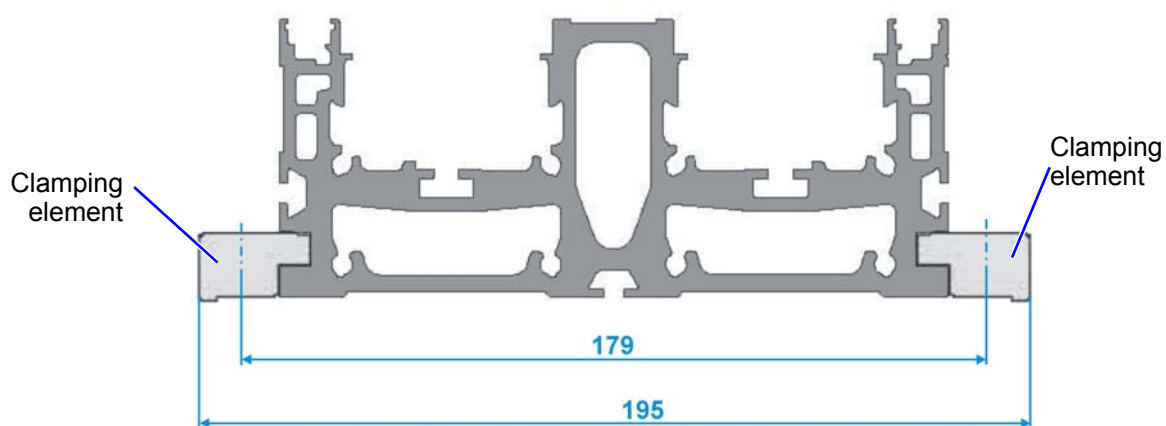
Crosswise cut with clamping elements and dimensions (Module 160/15)
